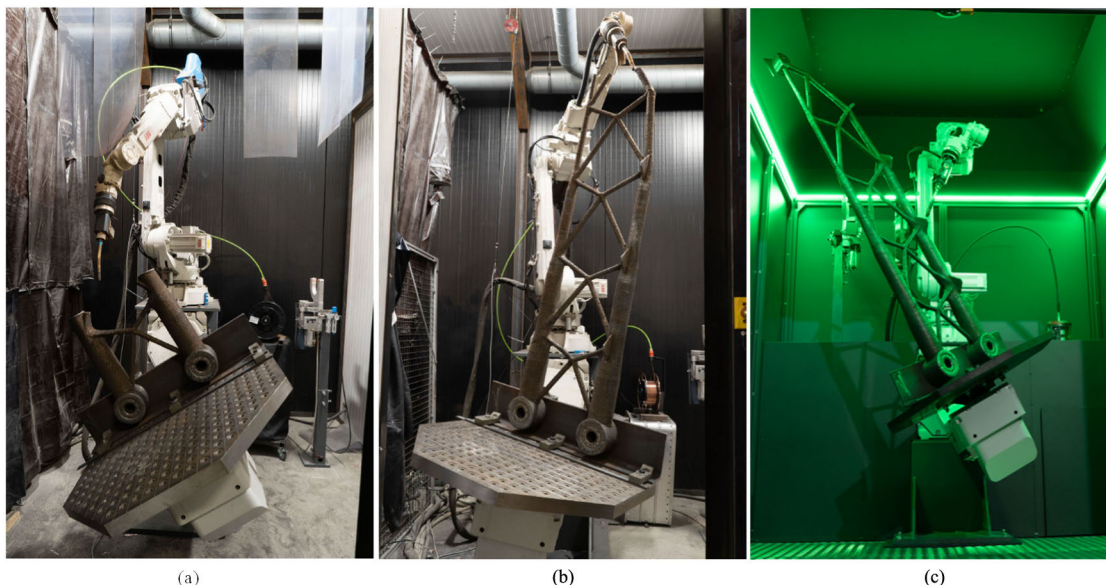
Printing of the cantilever truss: (a) zone 1, (b) zones 1 - 4 and (c) full truss.
